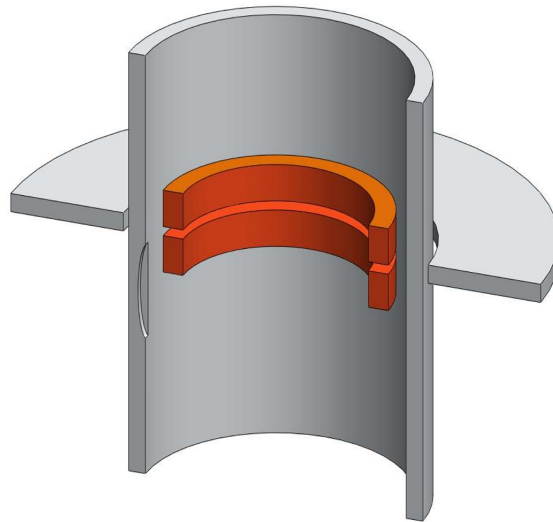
Differential bobbin coil inside a tube with a crack adjacent to a support plate.
